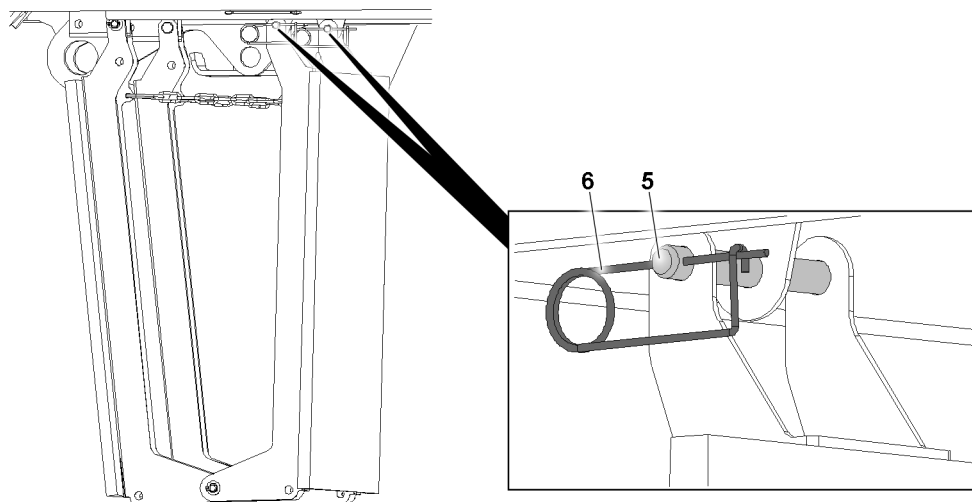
Assembling the assembly pedestal in the operating position — unpinning the assembly pedestal in the transport position
